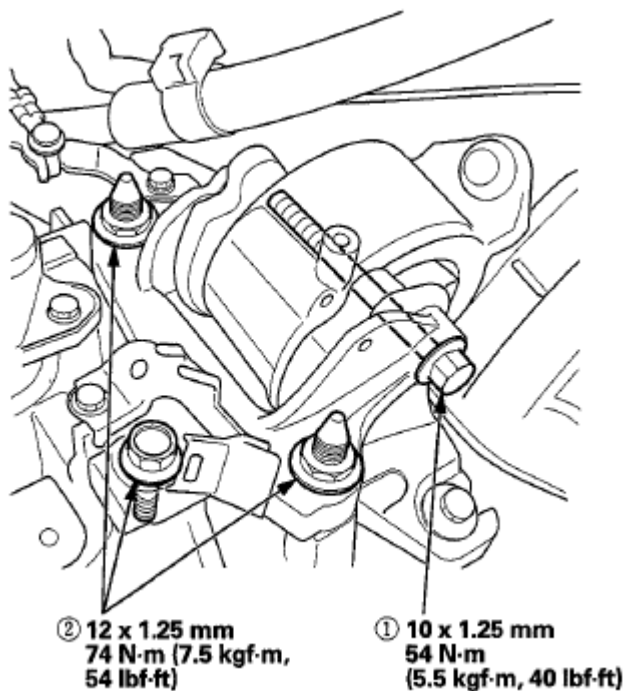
Identifying Torque Rod Mounting Bolt And Nut
